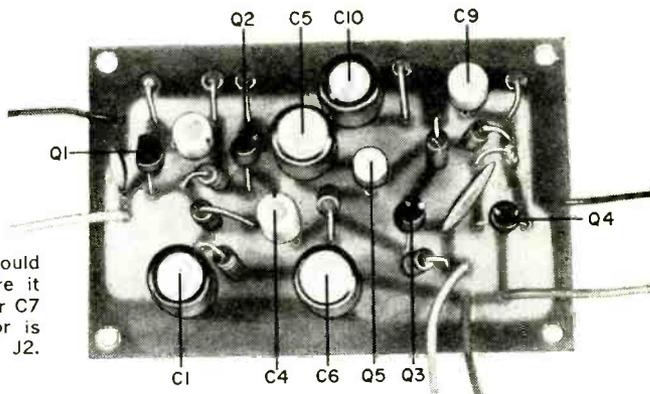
The printed circuit board should look something like this just before it is mounted in the cabinet. Capacitor C7 is not on the board—this capacitor is connected directly between R9 and J2.
